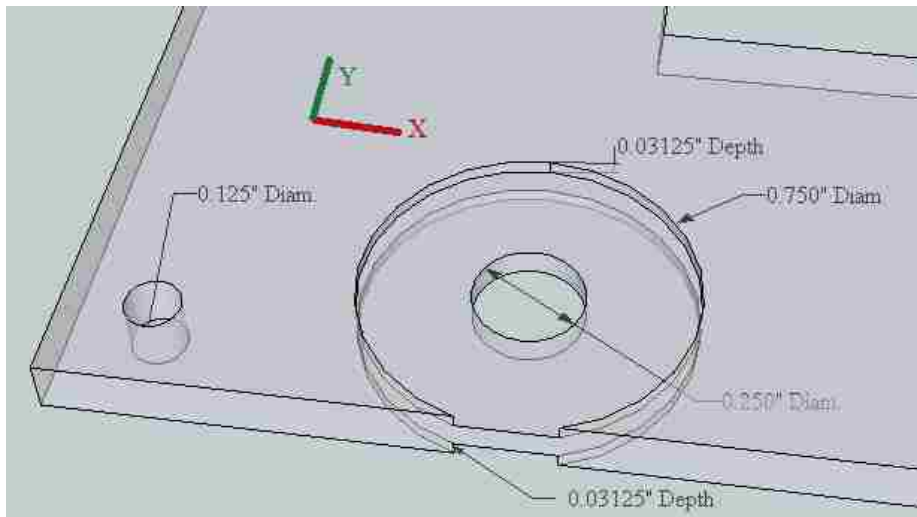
Orthogonal view of the 10x10 cm² middle trimmer aluminum plate illustrating hole dimensions.
